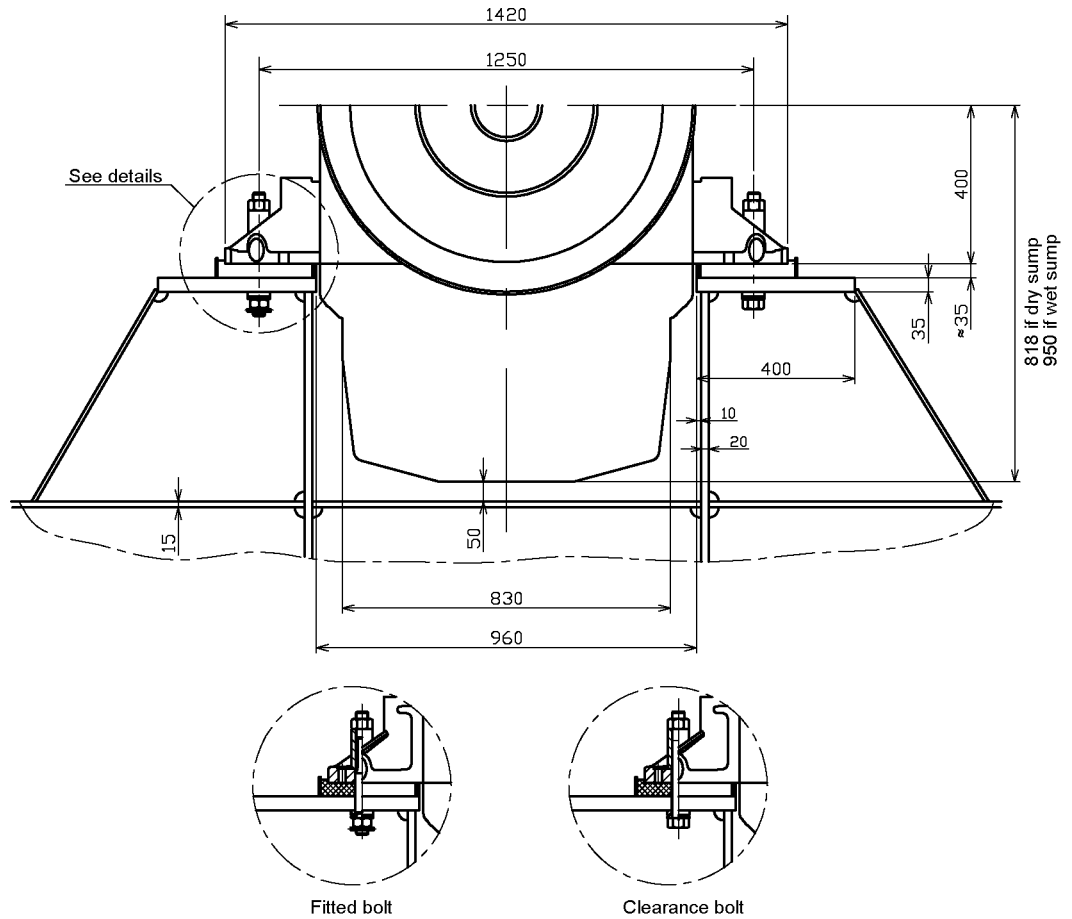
Seating and fastening, rigidly mounted in-line engine on resin chocks (DAAE077678a/DAAE077679a)
